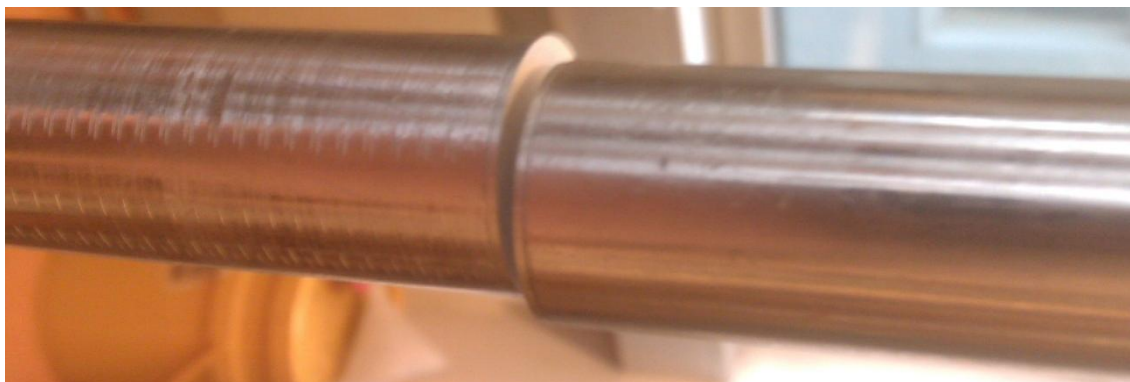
This picture is taken while the sample is in the tensile machine. The bonds have just successfully parted, and the misalignment is clearly visible.
